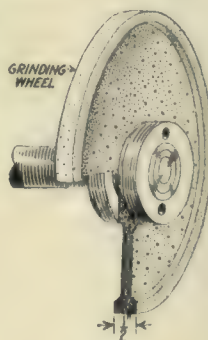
AND 2. THE WORK AND THE FIXTURE USED
